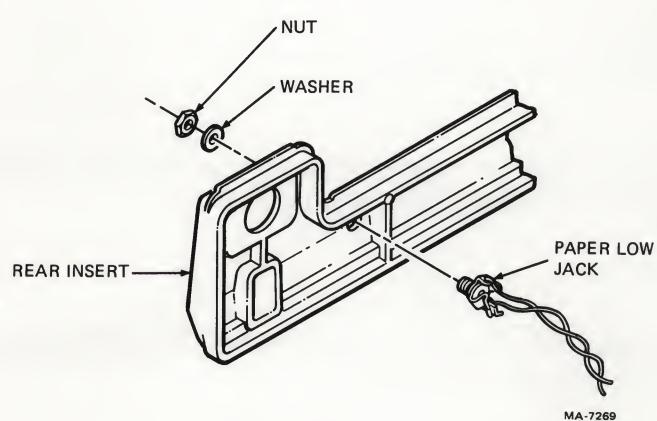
Attaching Paper Low Jack to Rear Insert
